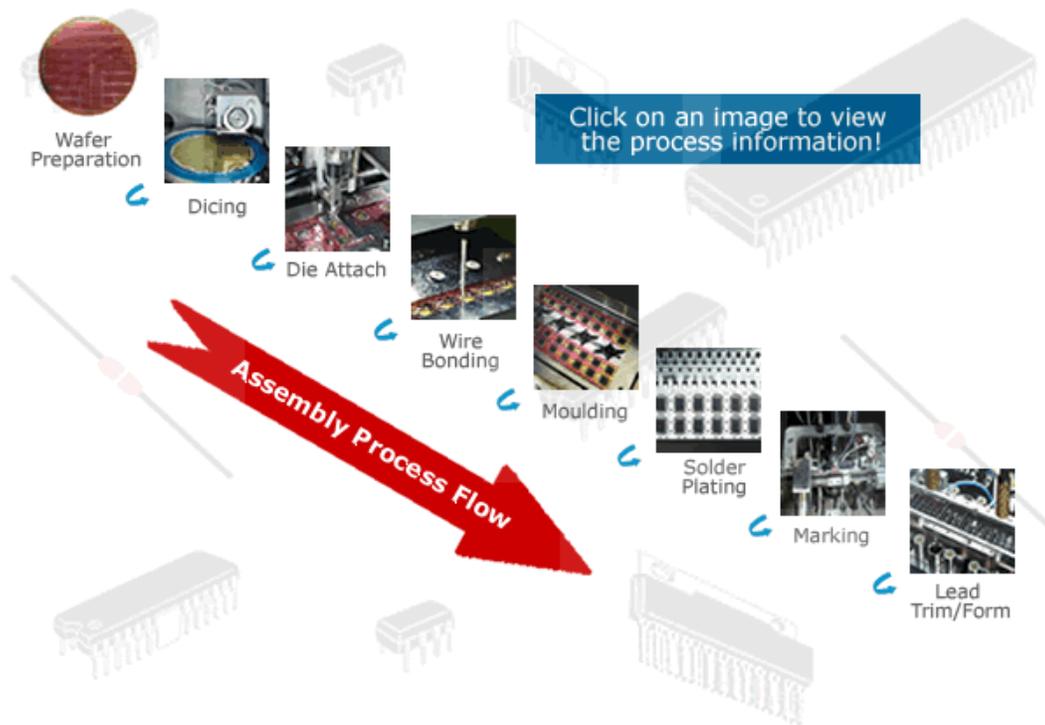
PACKAGE MANUFACTURING PROCESS
